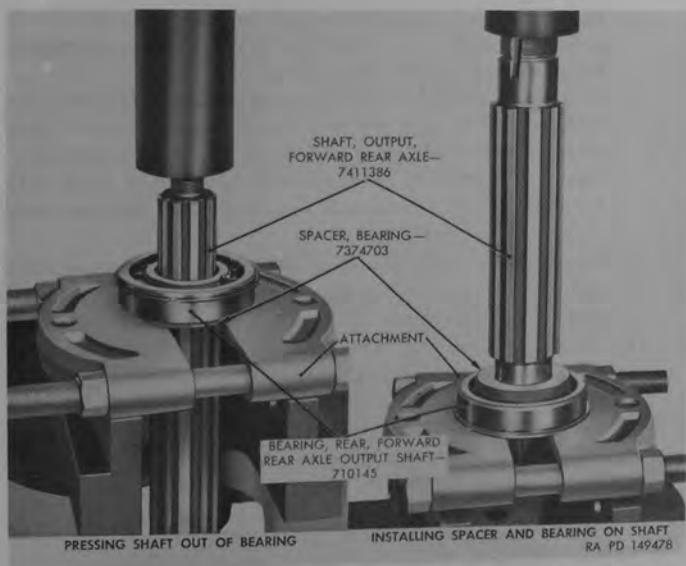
Use of attachment 41-A-345-328 (part of puller set 41-P-2905-60) for removing and installing rear bearing on forward rear axle output shaft.
